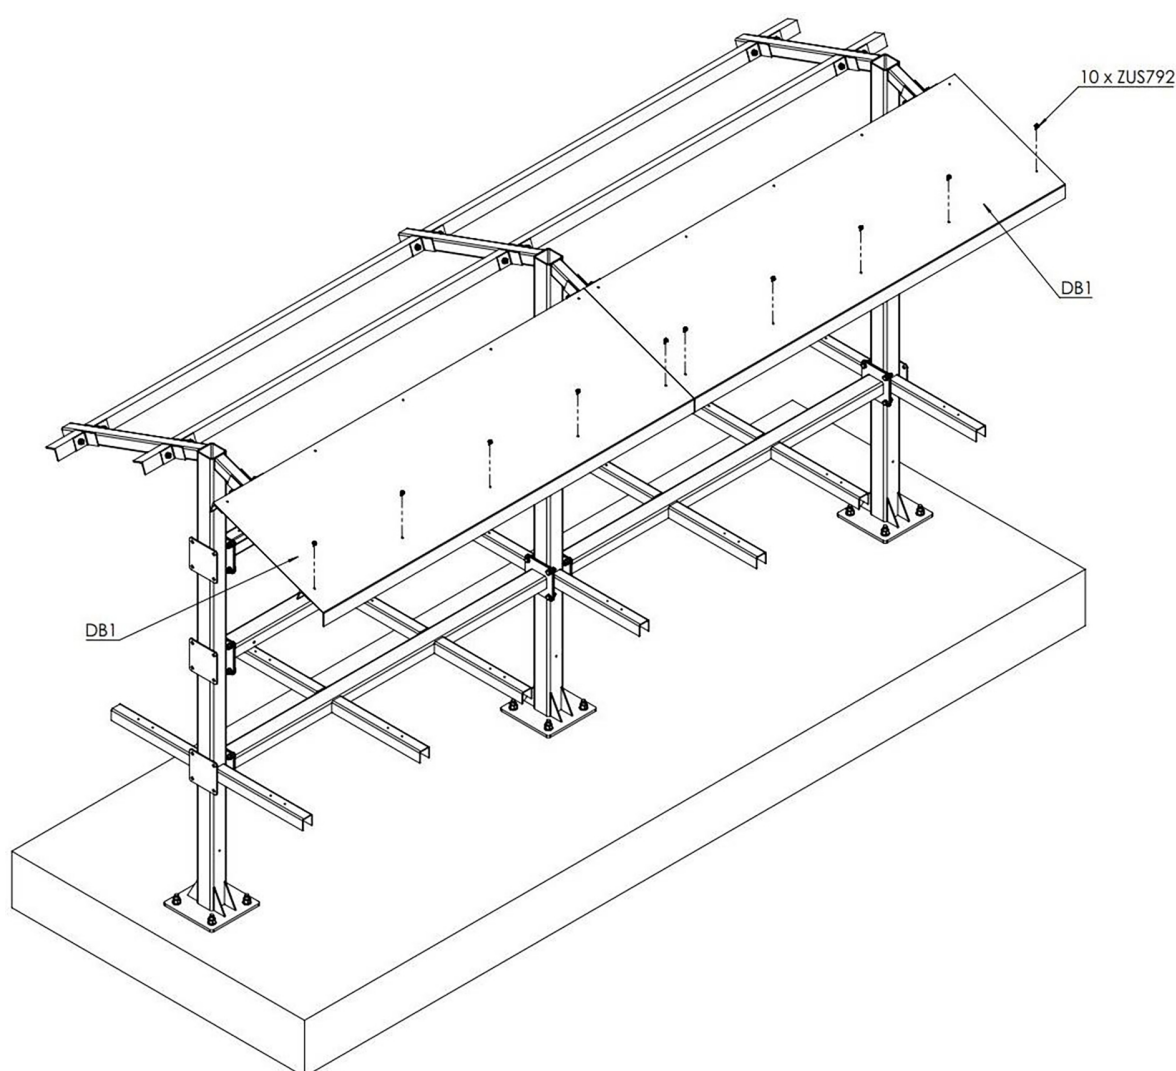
Assembly — Inverter rack — Sheet metal roof DB1
